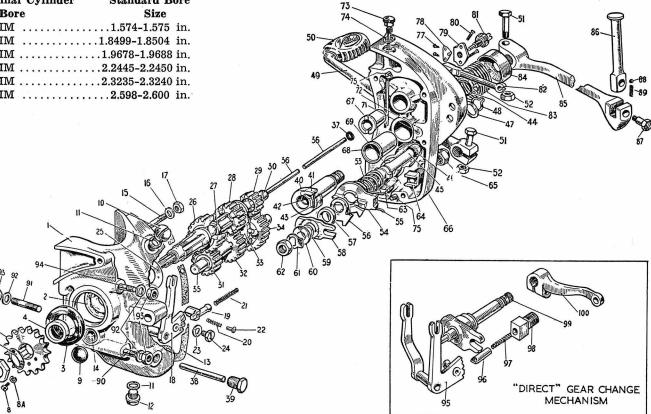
Exploded view of typical three speed transmission used on Mark 2L, 9E and 31C.
